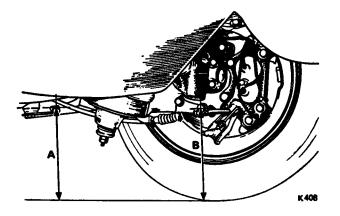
CAR HEIGHT CHECKING POINTS-REAR
